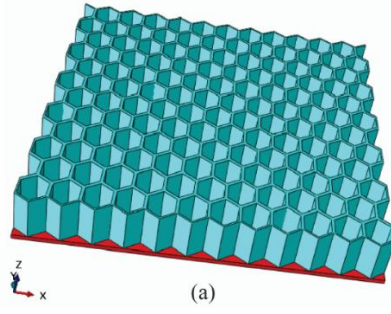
Three-dimensional model of the assembly a) Hexagonal honeycomb core assembly.
